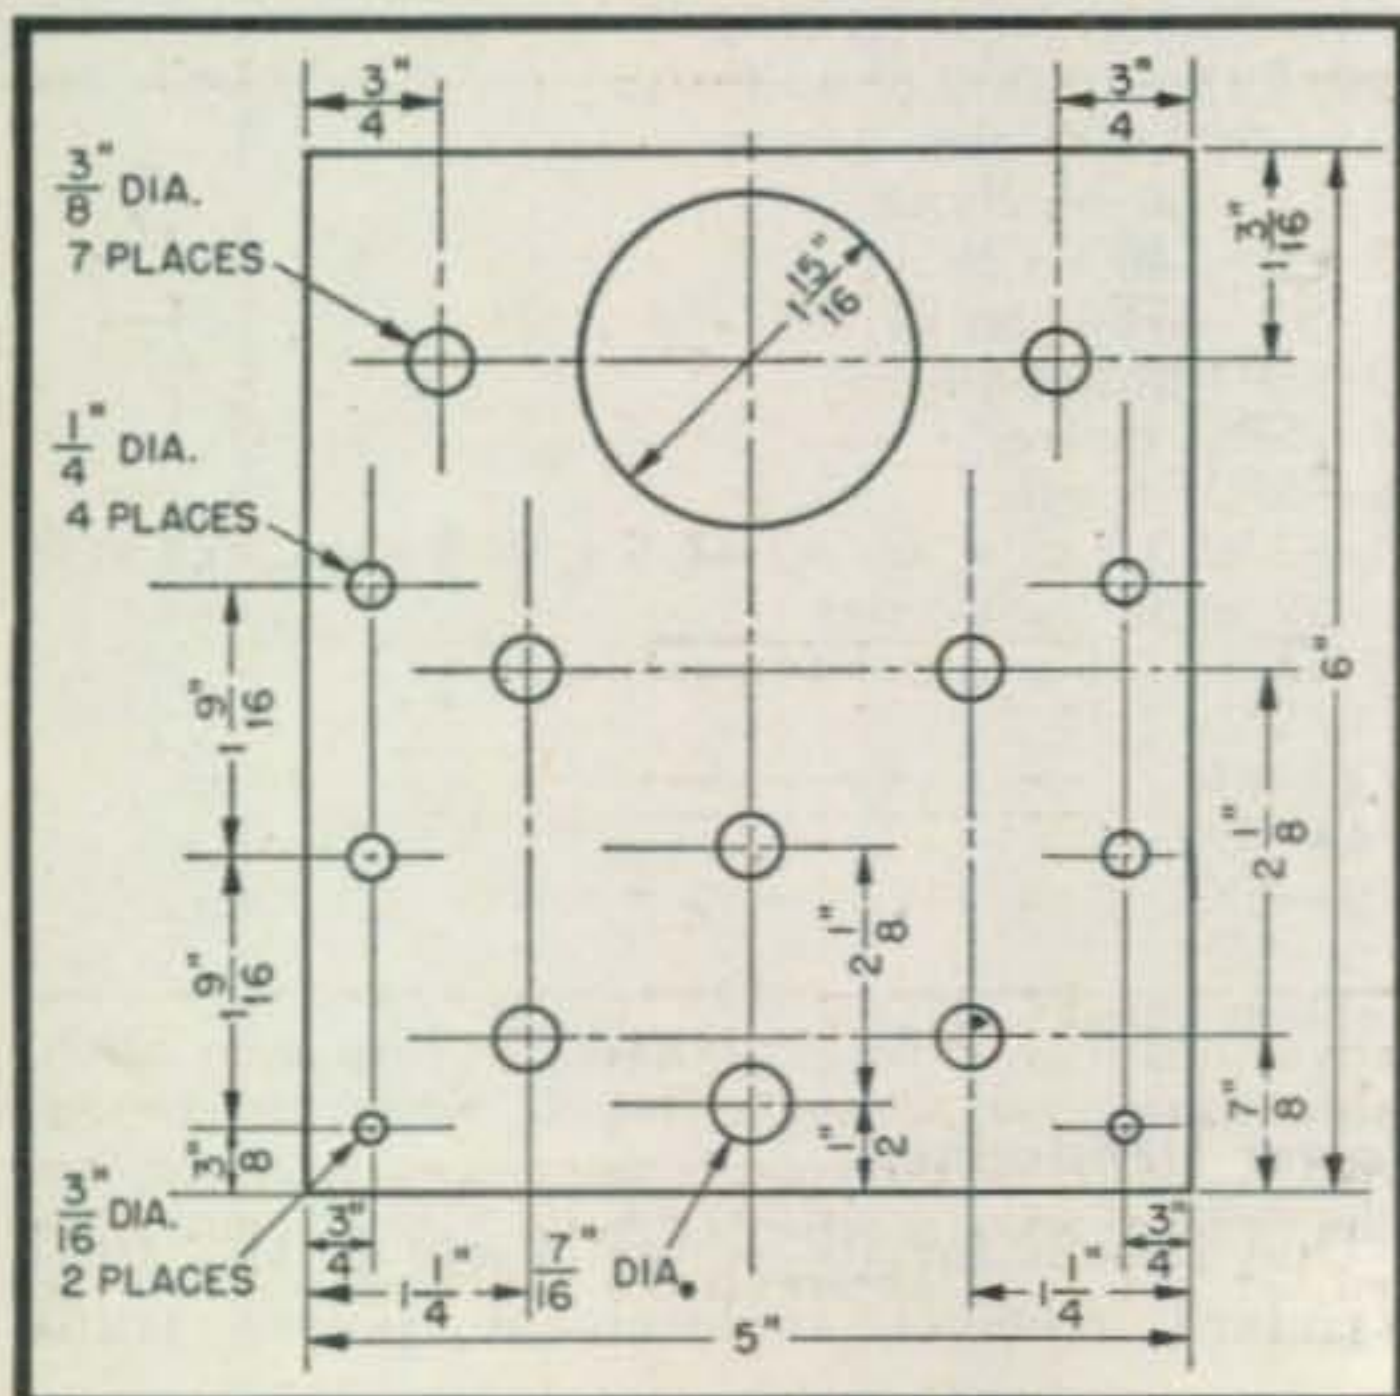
(left). Template for drilling front panel and laying out engraving. Fig. 3. (above). Template for chassis layout and drilling
